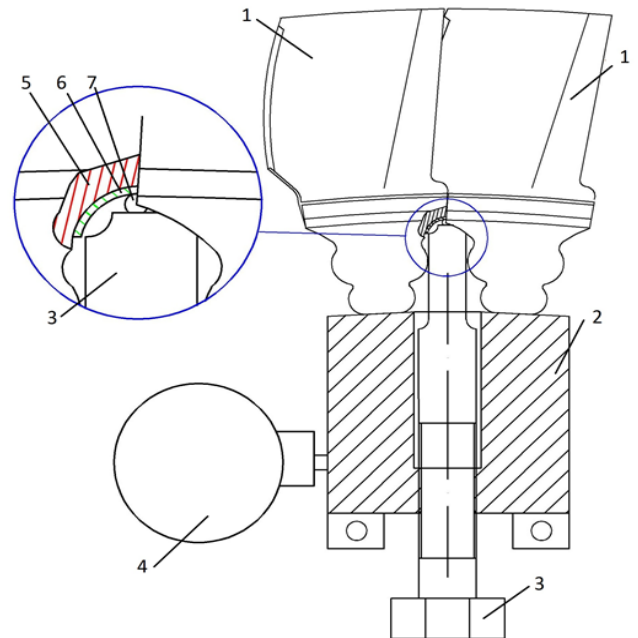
The test unit blades: 1 – blade, 2 – base, 3 – clamping screw, 4 – shaker 5 – shelf blade 6 – damper, 7 – steel ball
